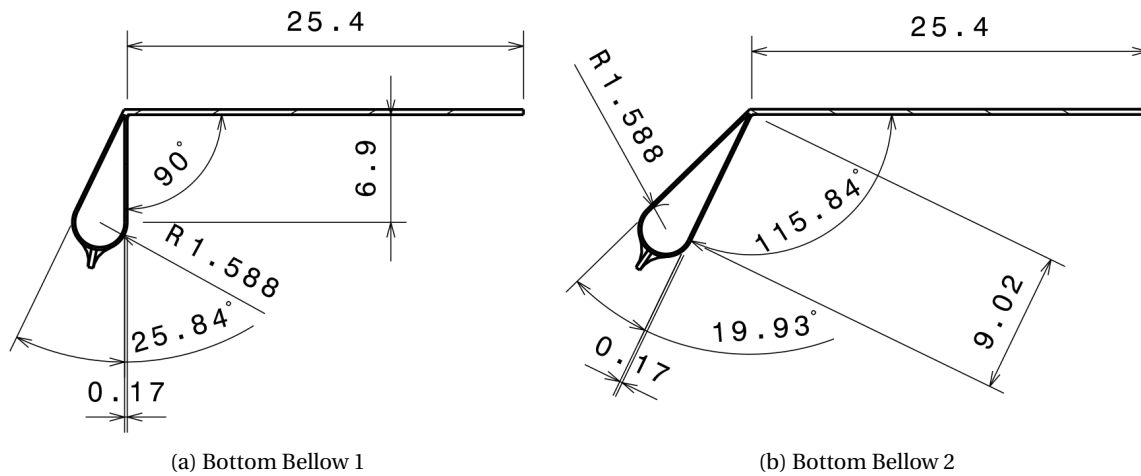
Cross-sectional view of the preliminary design of the bottom bellows with dimensions in [mm] and [deg]
